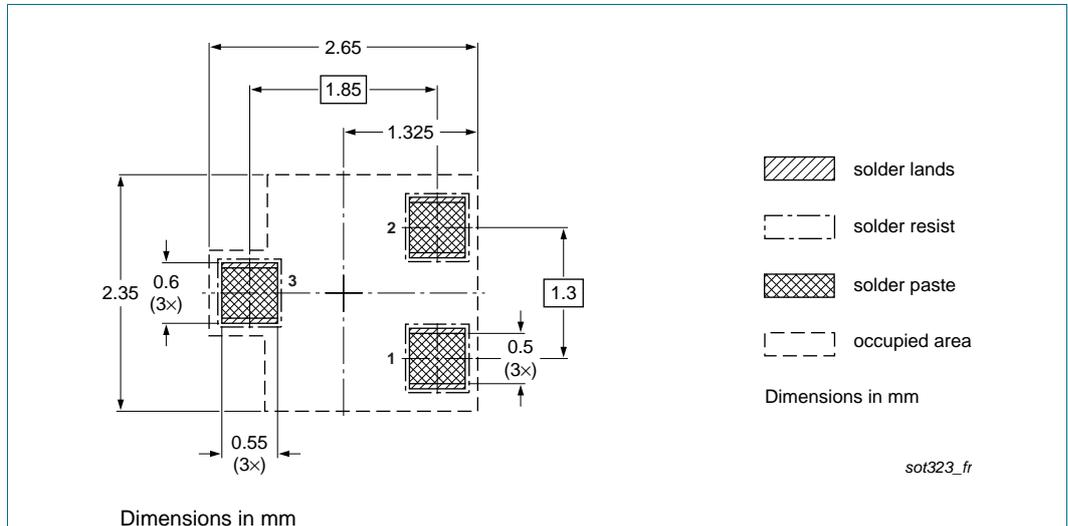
Reflow soldering footprint PDTB1xxxU series (SOT323/SC-70)
